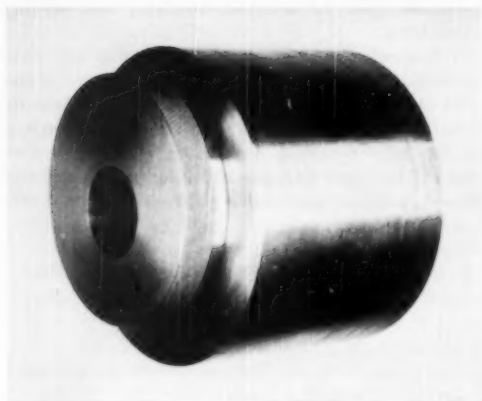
Drilling of Off-Center Holes Is Simplified by Eccentric Sleeve Fixture for Lathe Chuck
